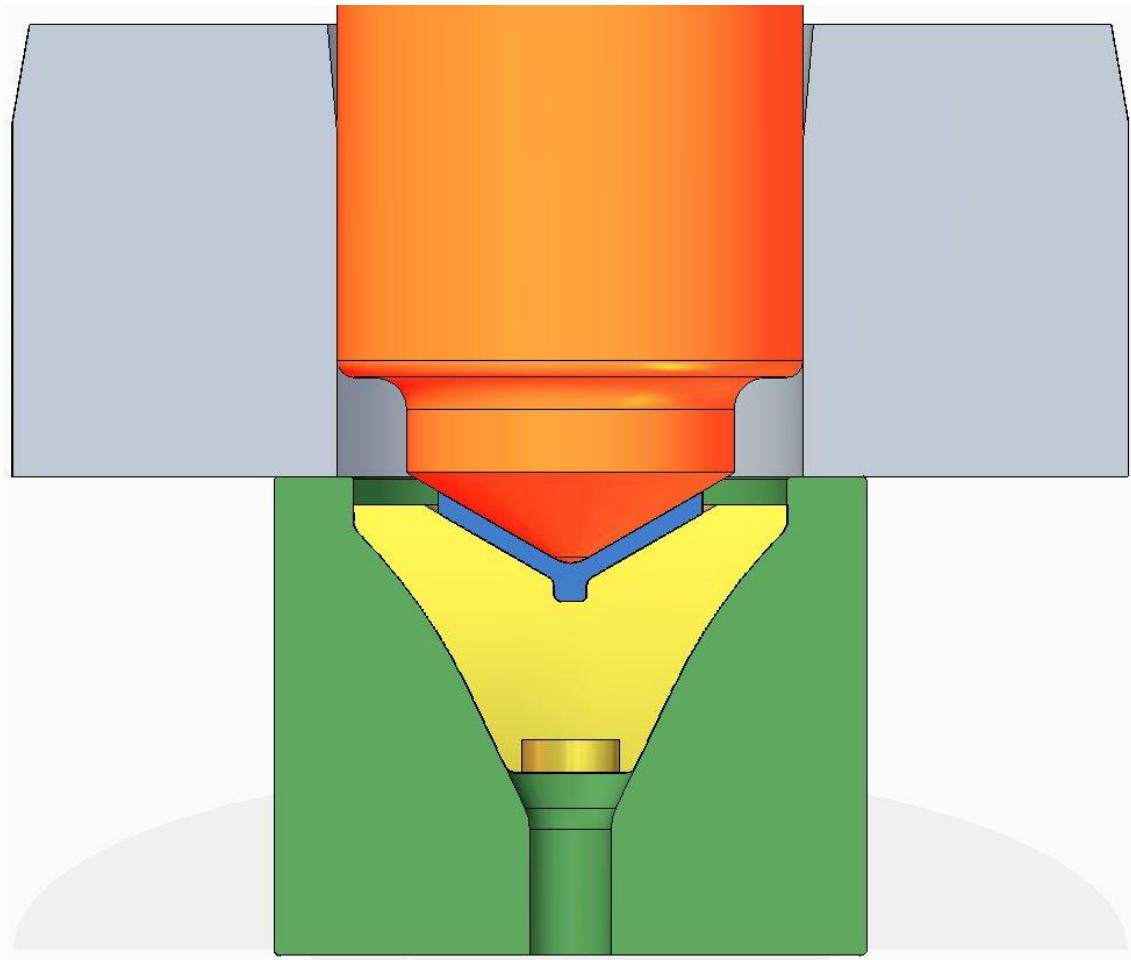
Forge tooling layout for manufacturing the 120° liner, after forging.
